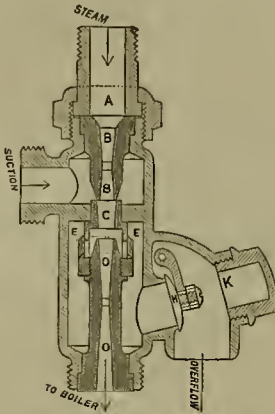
SECTIONAL VIEW OF INJECTOR.
